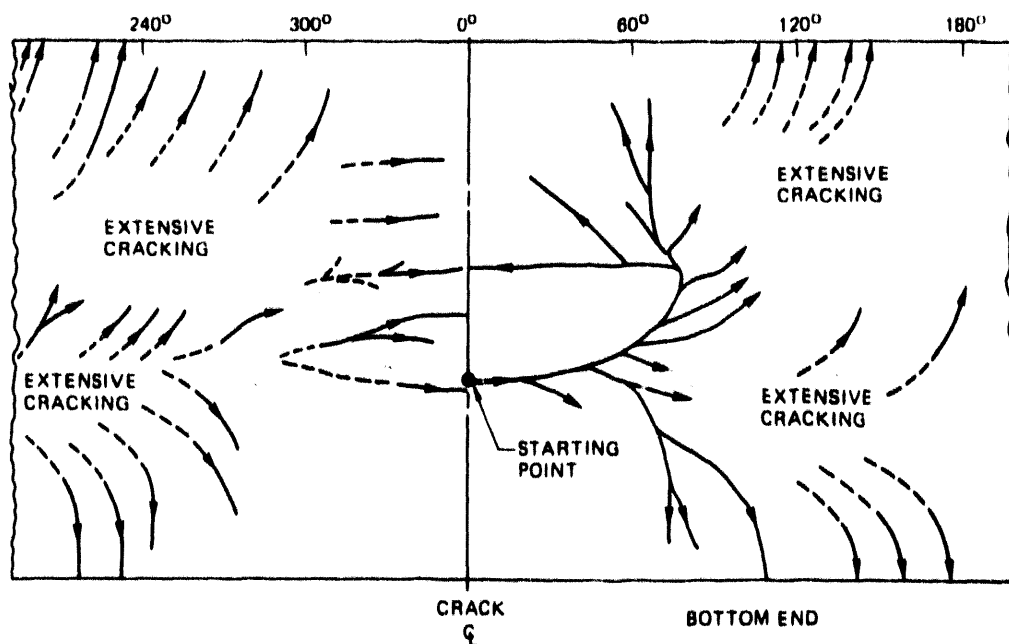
Developed view of inner surface of TSE-5 test cylinder showing surface extension of initially small (10 mm long \times 16 mm deep), circumferential, surface flaw.
